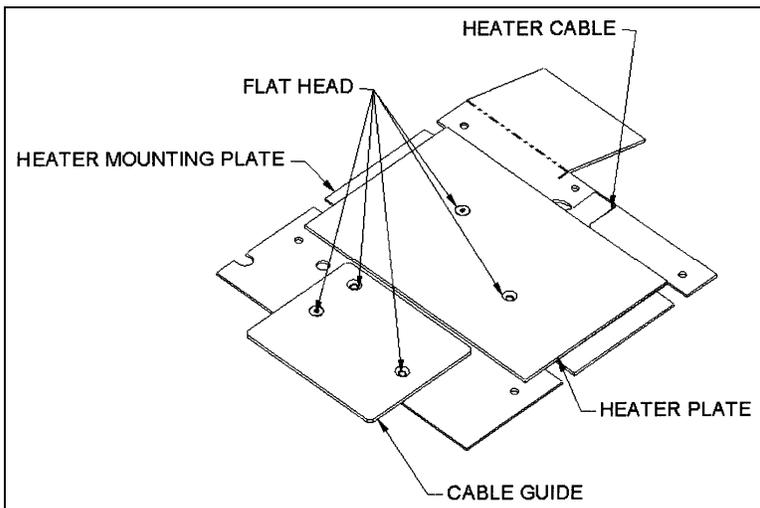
Mounting Heat Plate Assembly to Heater Mounting Plate
